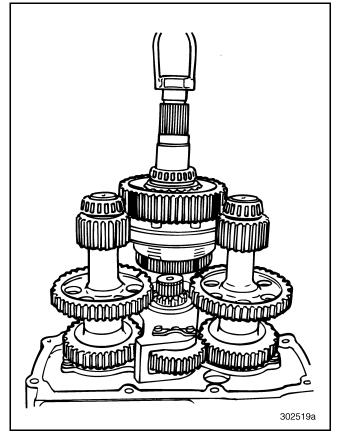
Installing Output Shaft and Synchronizer Assembly (T313LR21/T318LR21 Shown)
